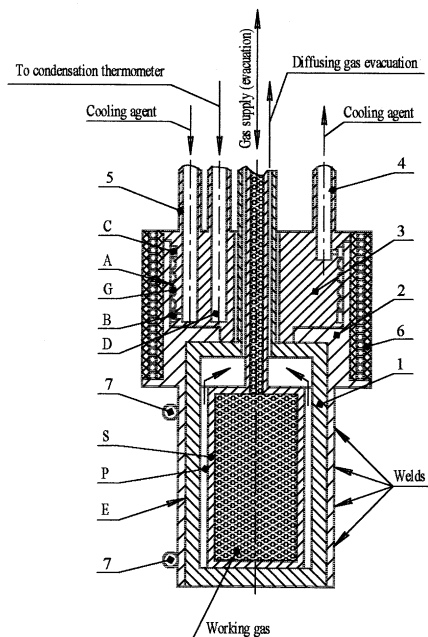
Schematic drawing of the target unit: 1 – ampoule; 2 – casing; 3 – insert; 4,5 – connecting tubes; 6 – heater; 7 – thermocouples
